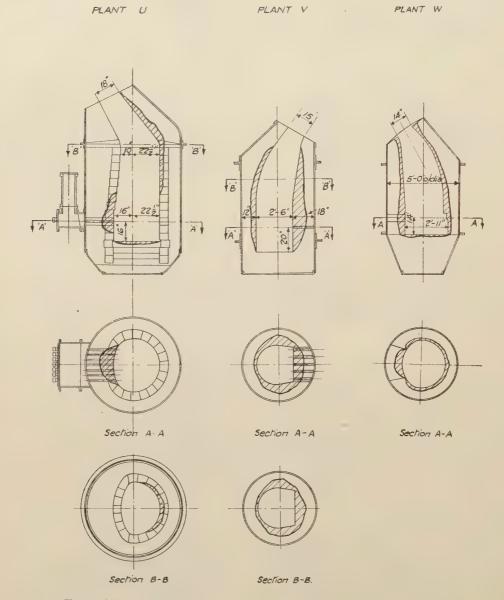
(d)—Details of converter construction at Plants U, V and W
